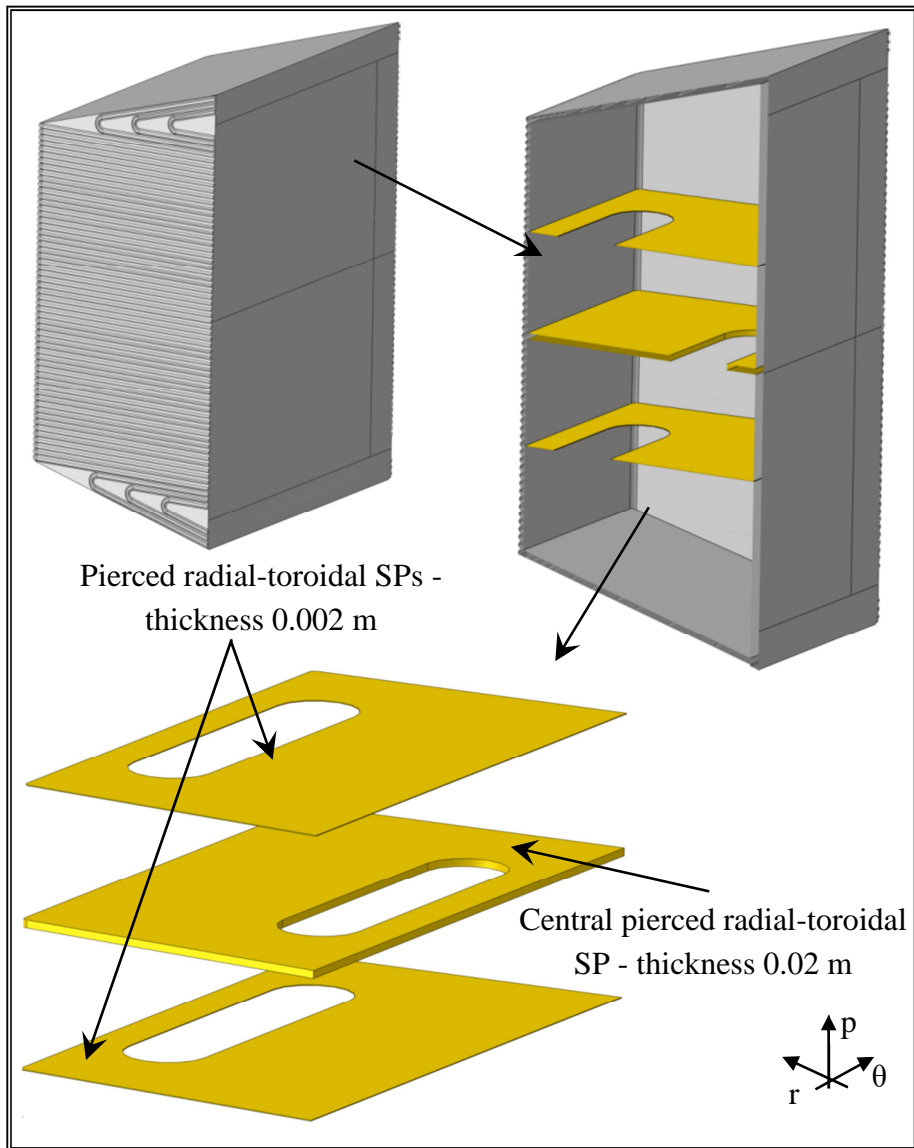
Configuration 0 - 3D geometric model exploded view.
